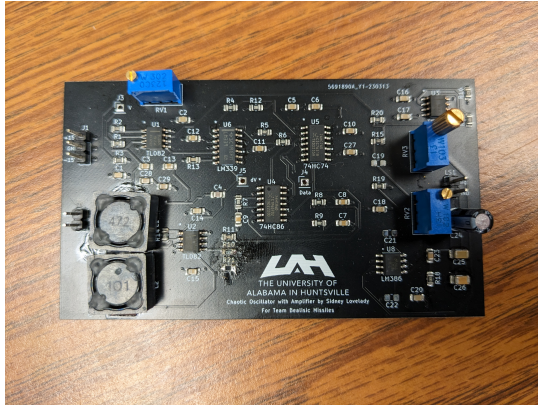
10kHz solvable chaotic oscillator PC Board. Designed in KiCad 6.0 and manufactured at JLCPCB
